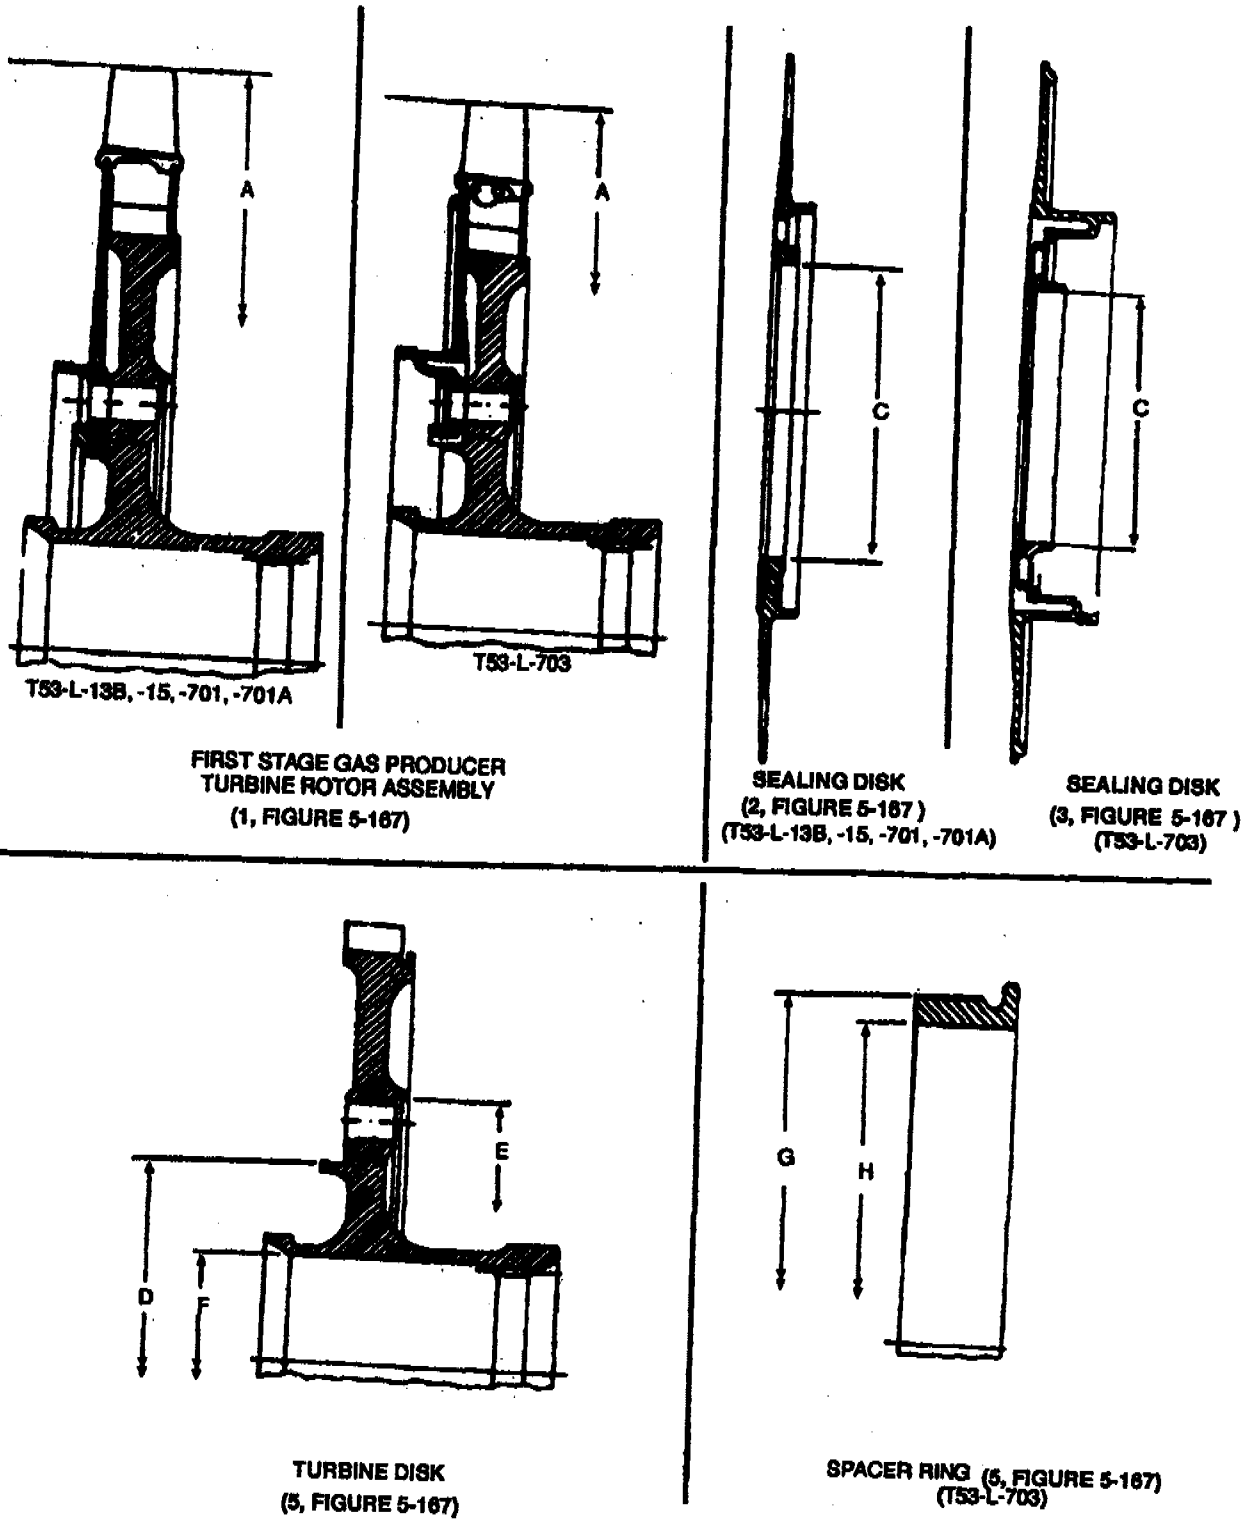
First Stage Gas Producer Turbine Rotor Assembly, Aft Oil Ring, and Seal Ring Dimensional Inspection Locations.
